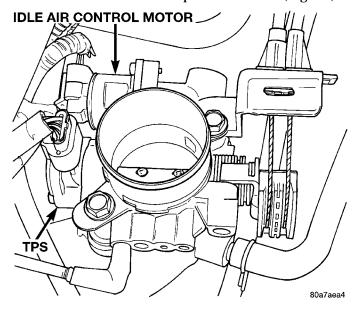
Idle Air Control Motor and Throttle Position Sensor—Typical
